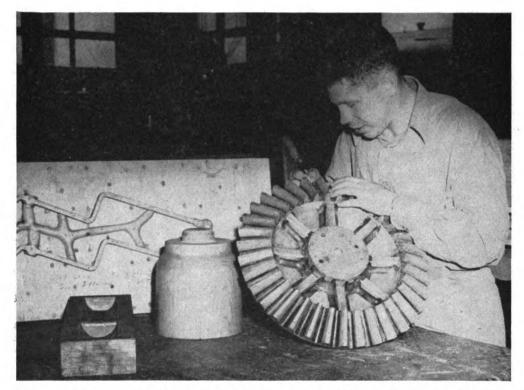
Pattern maker finishing pinion-gear pattern. In background, gear-shift-lever pattern on match plate.
